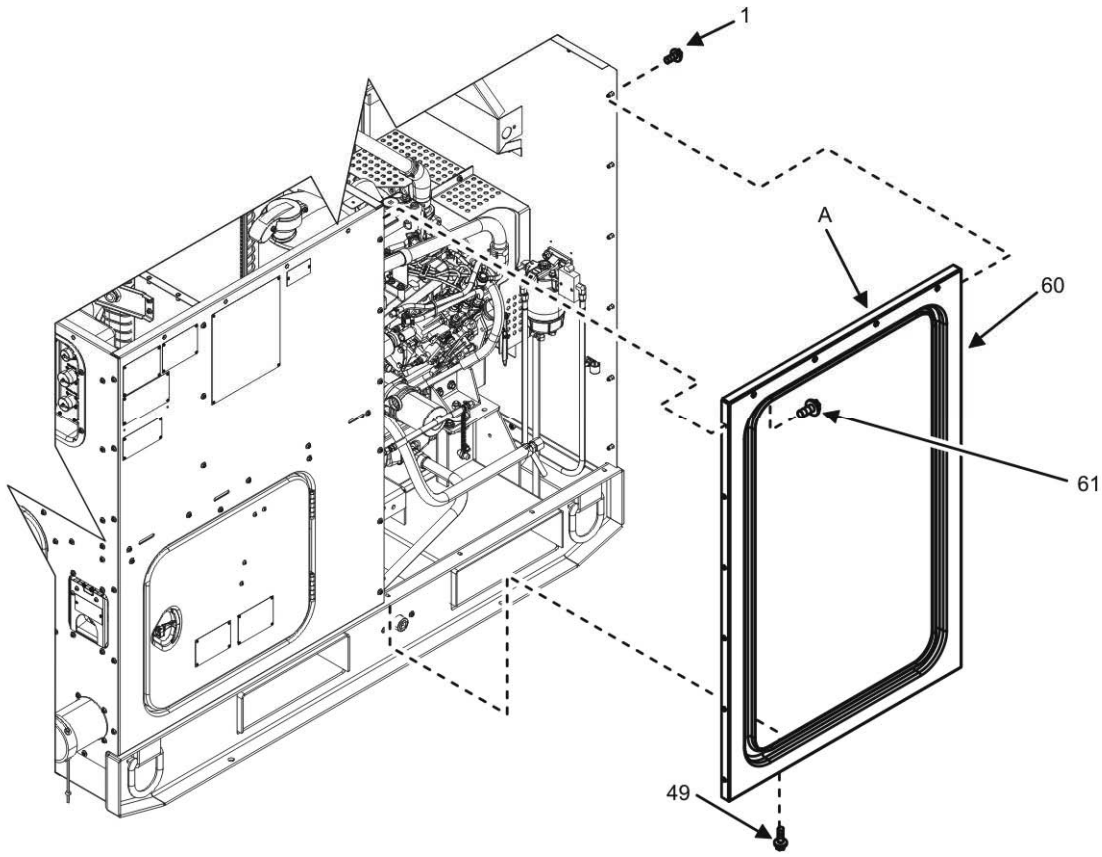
Housing Installation (Sheet 12 of 16 Right-Side Shown).
